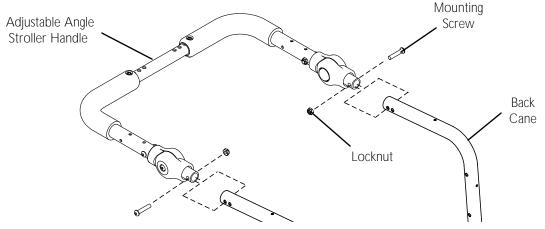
Installing/Removing Adjustable Angle Stroller Handle
